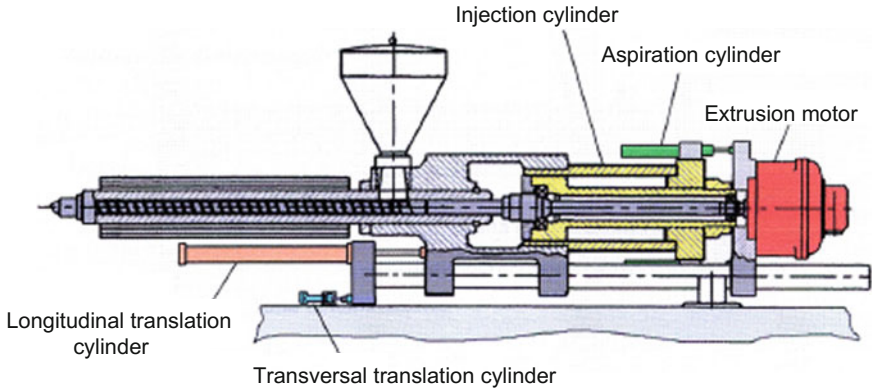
Injection machine parts (Reproduced from Eurecat)
